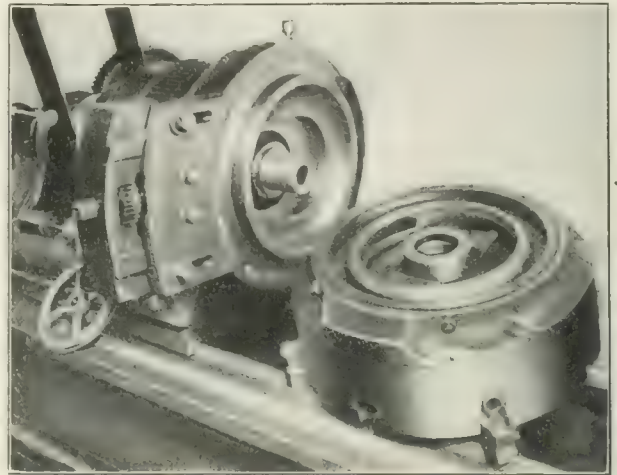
The Moller Oval Chuck Partly Unassembled.
